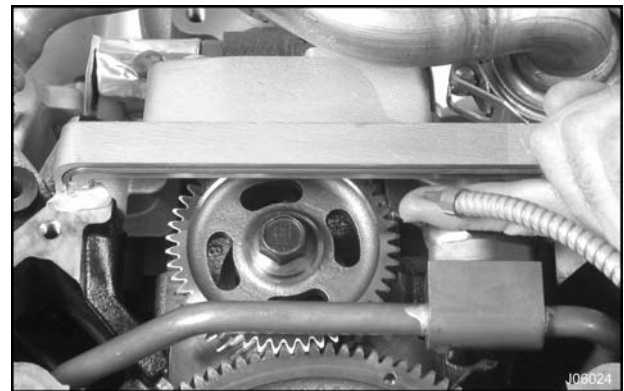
Applying oil to the high-pressure pump cover gasket (typical)
